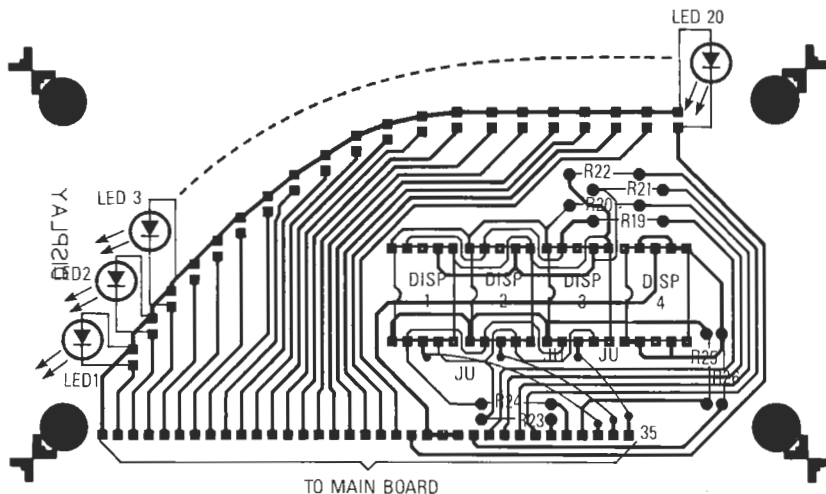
STUFF THE DISPLAY BOARD as shown here. The flat side of each LED should point toward the bottom of the board. The two boards are sandwiched together, and corresponding pads on the boards are connected with short pieces of stiff wire.
